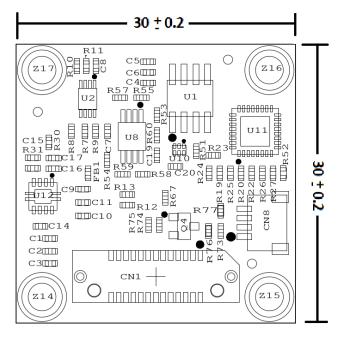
Front View of e-CAM24\_CUNX Adaptor Board Mechanical Dimensions
